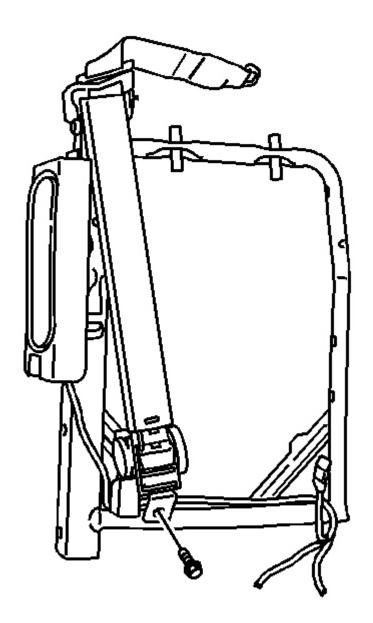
Removing/Installing Lower Seat Belt Retractor Retaining Bolt Courtesy of GENERAL MOTORS CORP.
